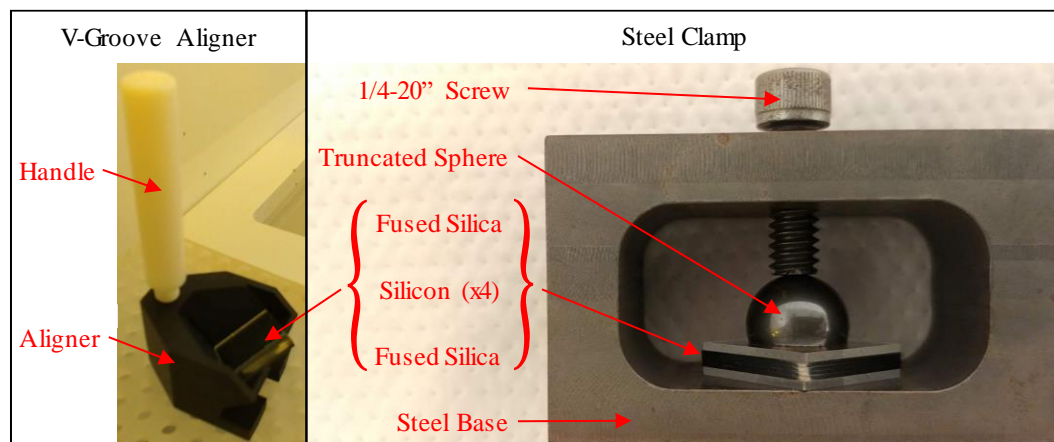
V-groove mechanical aligner and the steel clamp.
